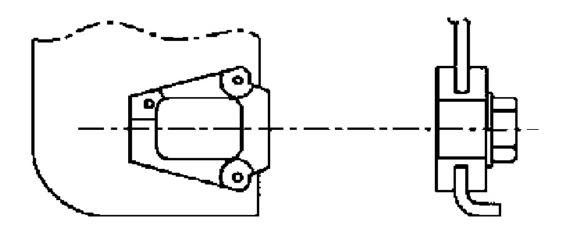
Inspecting Capsules On Steering Column Bracket Assembly Courtesy of GENERAL MOTORS CORP.
